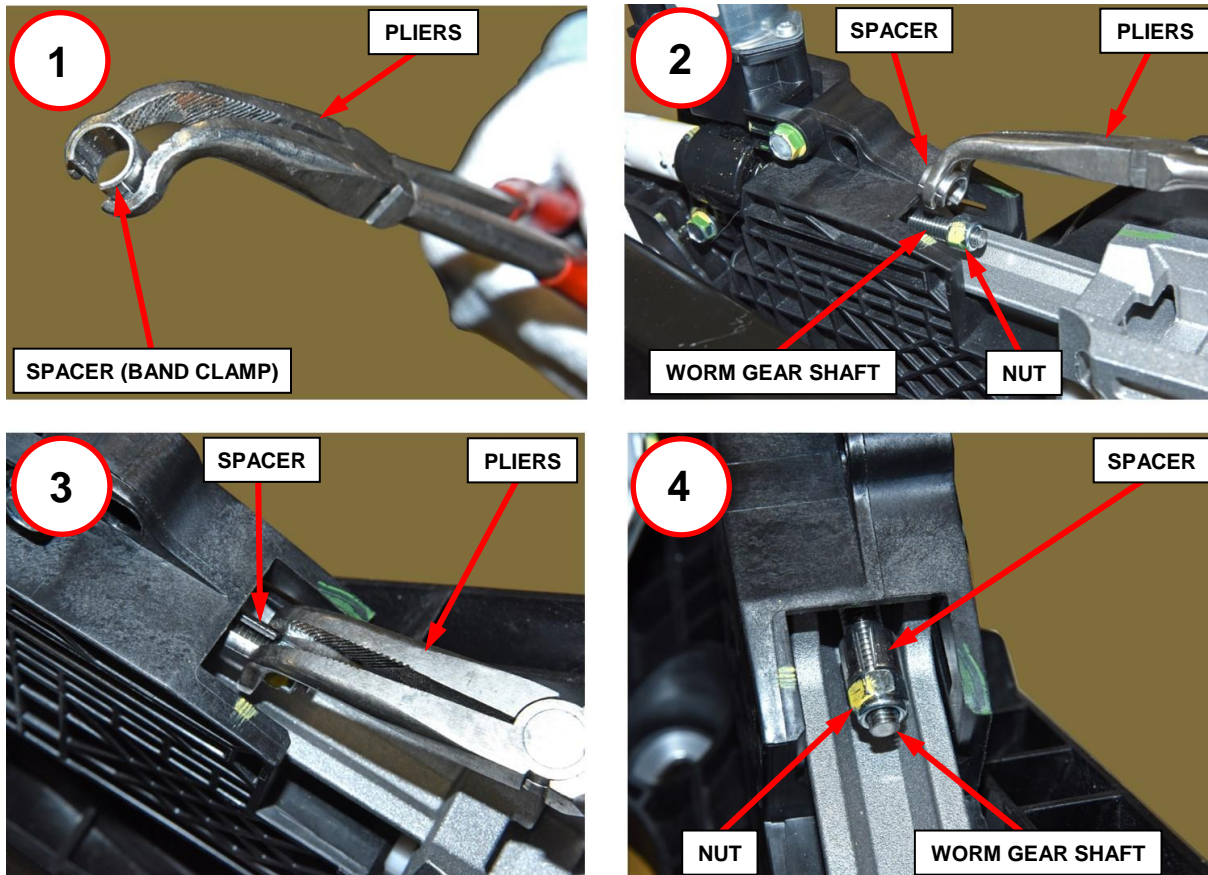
Worm Gear Shaft Spacer (Band Clamp) Installation
